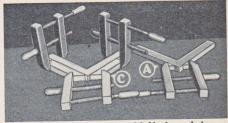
Gluing mitre joint with blocks and clamps. Especially useful in making dowel mitre joints.
